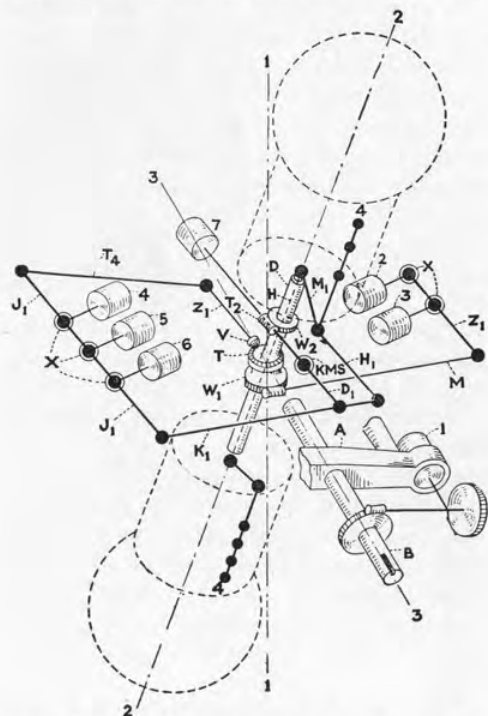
COMPLETE DESIGN OF MOTOR DRIVE IN SCHEMATIC FORM.
